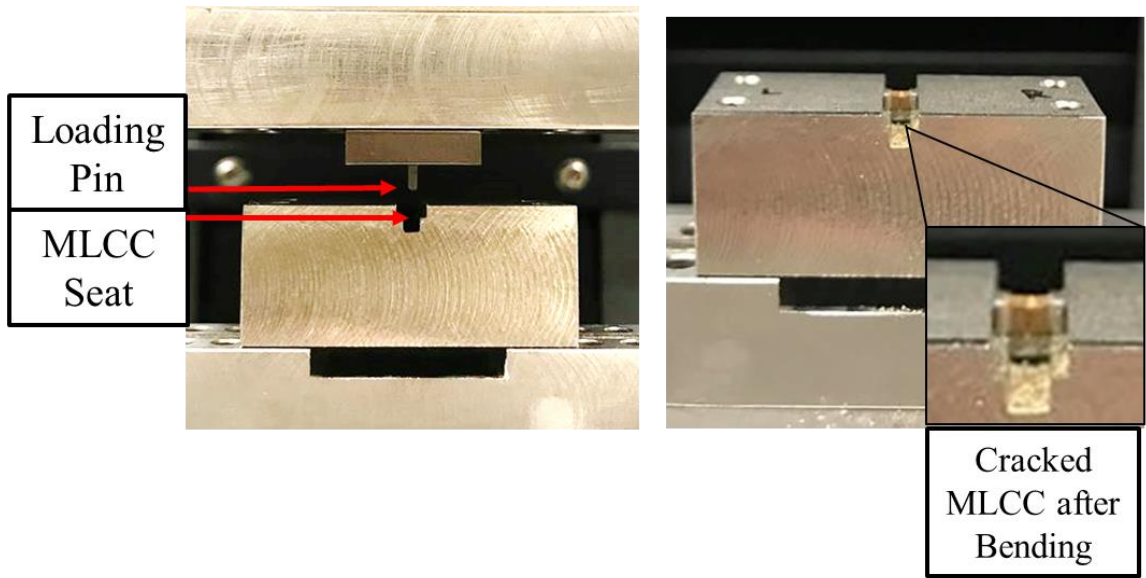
Loading Pin and Test Fixture Machined According to AEC-Q200-003
